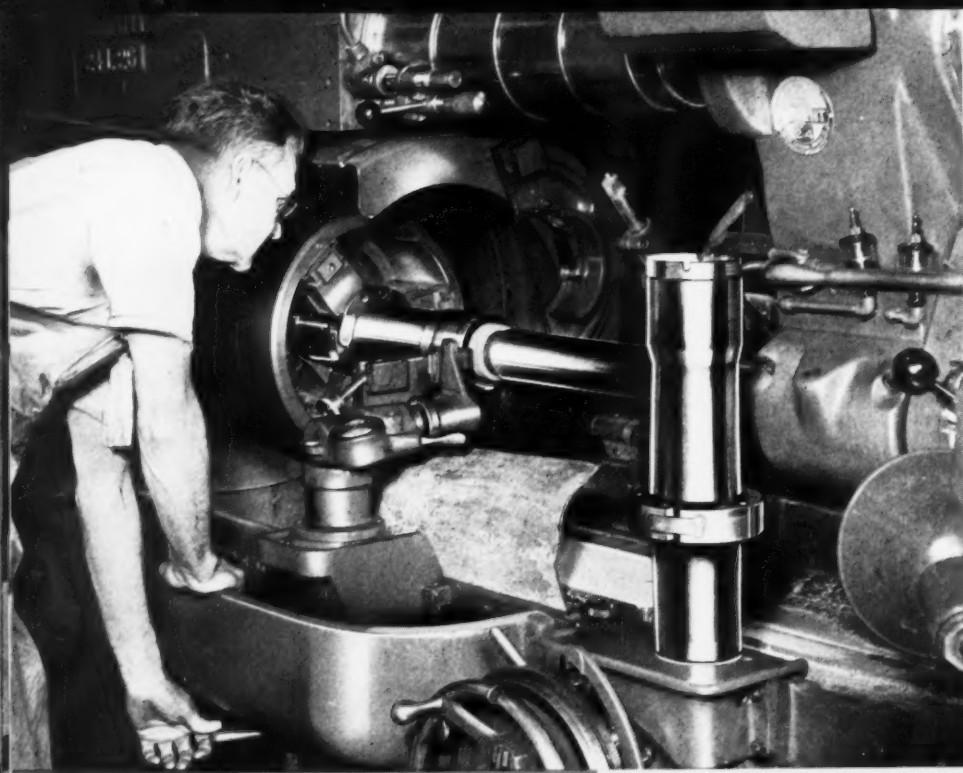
Two Bores of Outer Cylinders for Front-wheel Struts are Ground to Size in a Chucking Grinder within a Tolerance of 0.0015 Inch
